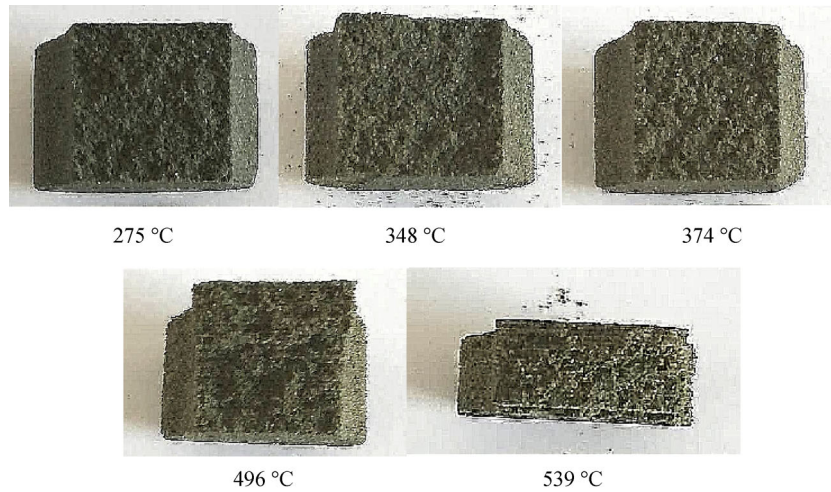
Sections of printed sand molds at different infrared heating temperatures.
